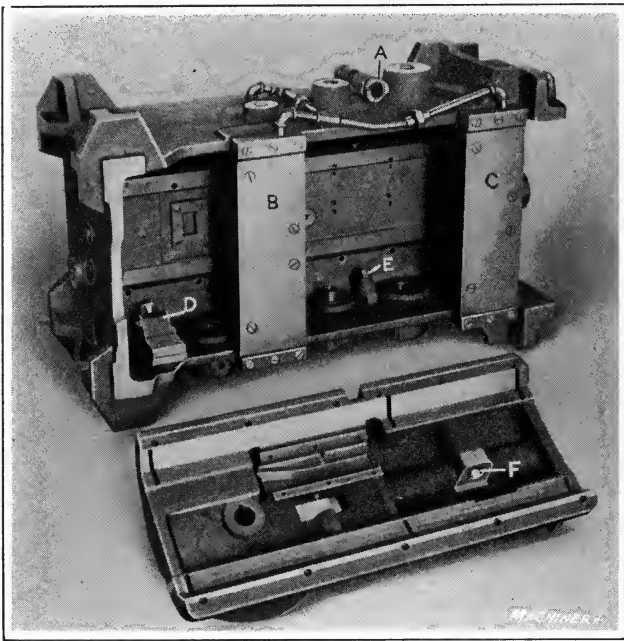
Drill Jig equipped with Air-operated Clamping Devices
